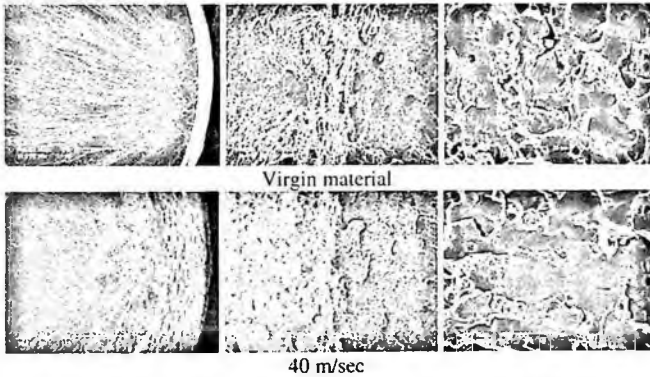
SEM fractography showing fracture surface by the Al6061-T651
